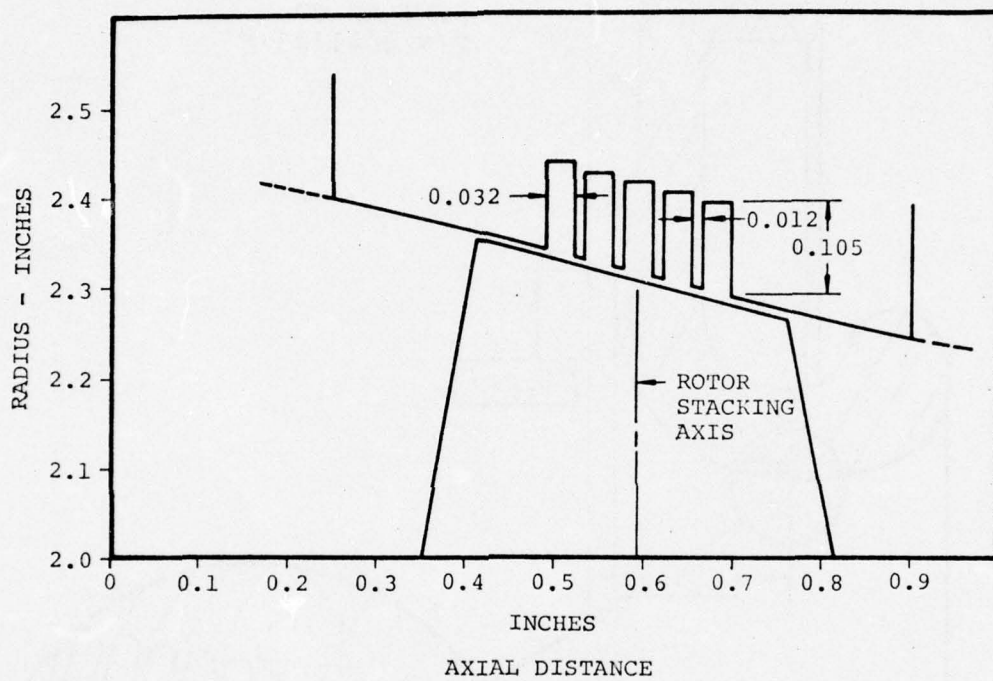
Grooved Casing Insert Design for a Small Axial Compressor.
